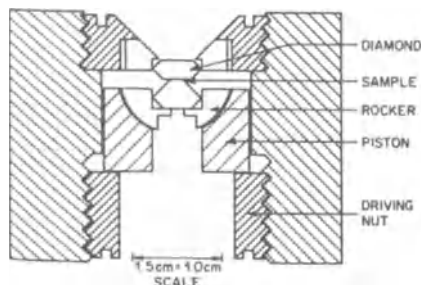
Cross-section drawing of the Bassett cell showing the hemi-cylinder hardened rocker supports for anvil alignment and the very simple force generating mechanism of a driving nut pushing against a movable piston in a guiding cylinder [8].
